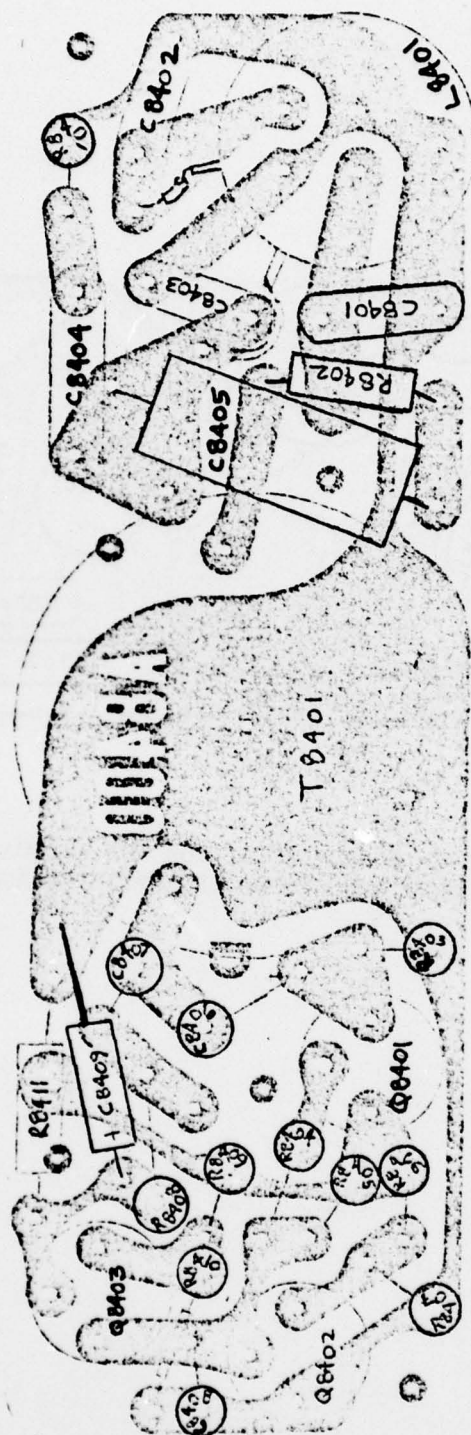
P.C. BOARD LAYOUT FOR THE A8400A TRANSMIT HUNT GENERATOR ASSEMBLY
